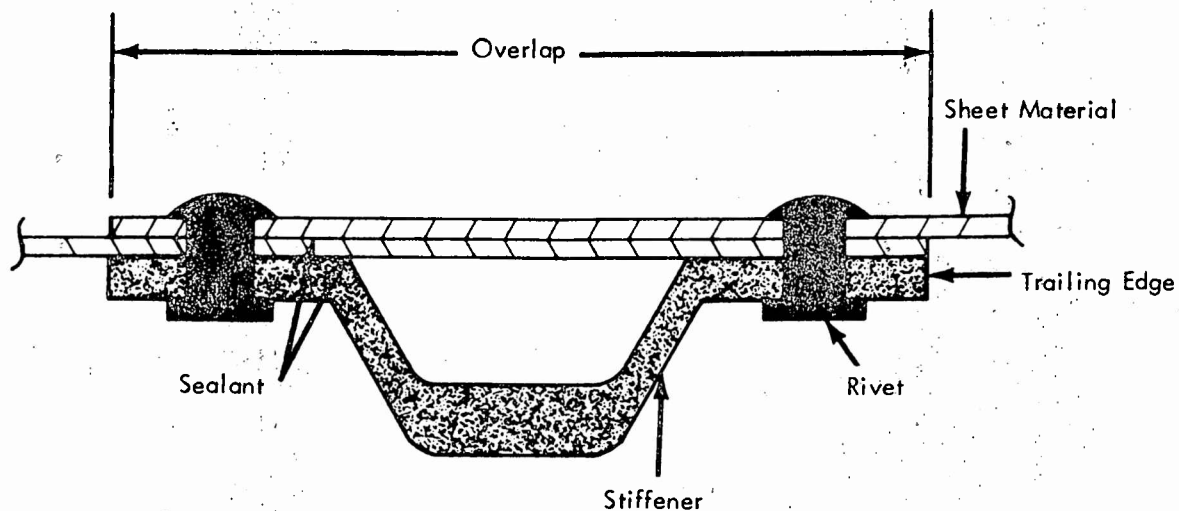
Typical Panel Overlap and Post or Stiffener
